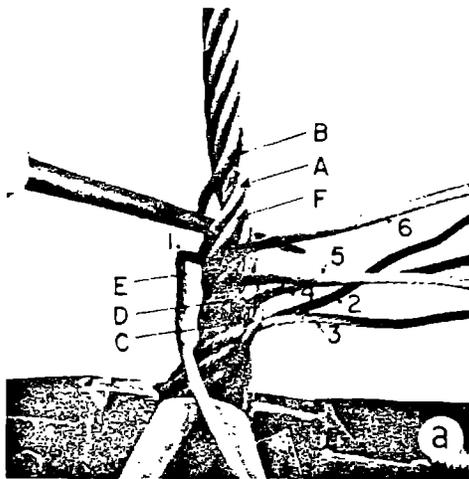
Starting Second Set of Tucks for Strand 2 by Inserting Marline Spike Under Strand B.
